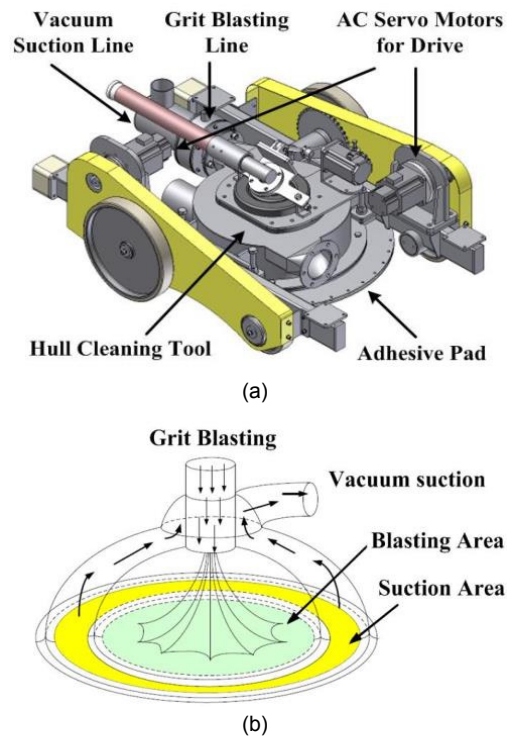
Structure of the hull cleaning robot and the hull cleaning tool (a) Structure of the hull cleaning robot (b) hull cleaning tool
